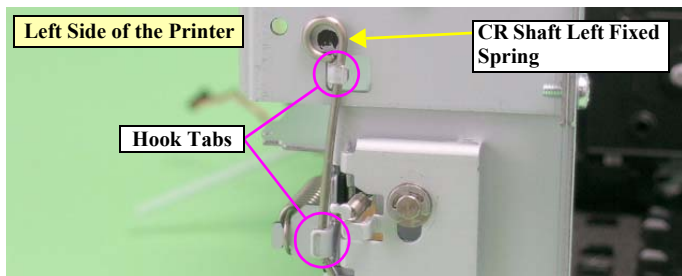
Reinstalling the CR Shaft Left Fixed Spring
